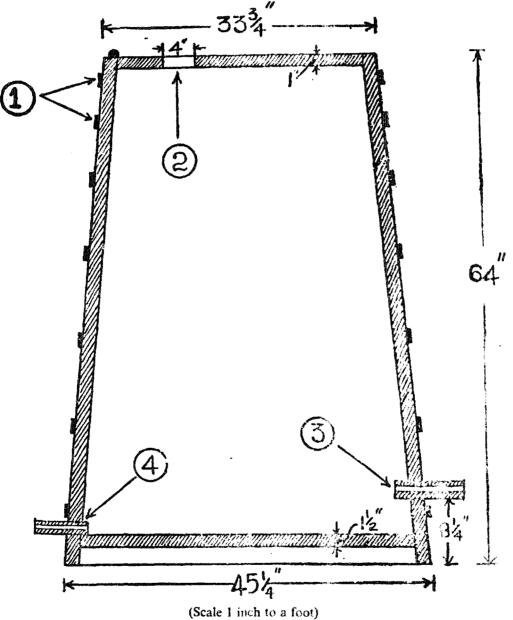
FIGURE IV SECTIONAL ELEVATION OF RECEIVING TROUGH
